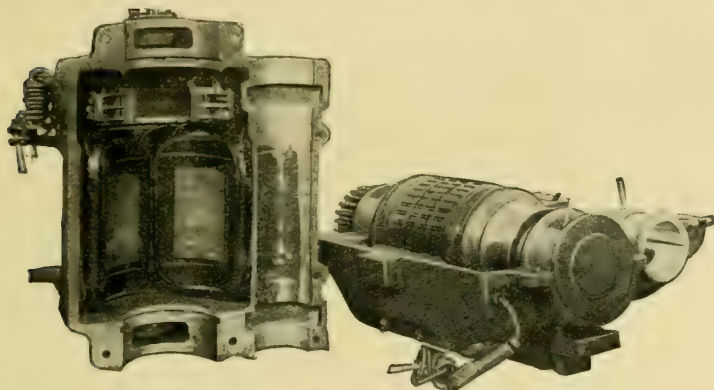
Westinghouse No. 85 Motor. (Showing Parts.)
